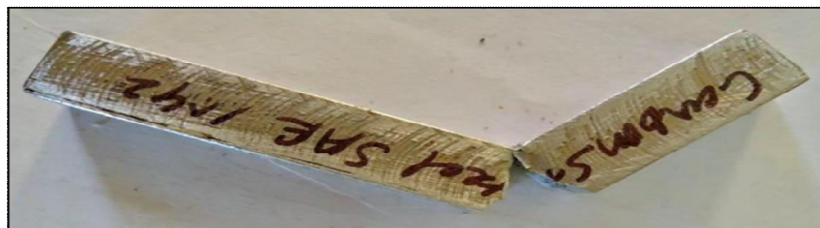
SAE 1042 Carbon Steel Specimen After Testing
